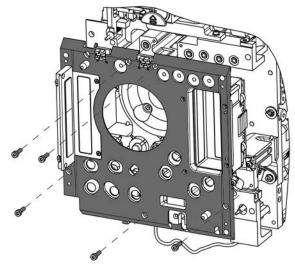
Fluidics Module: Screws Securing Faceplate to Primary Manifold
